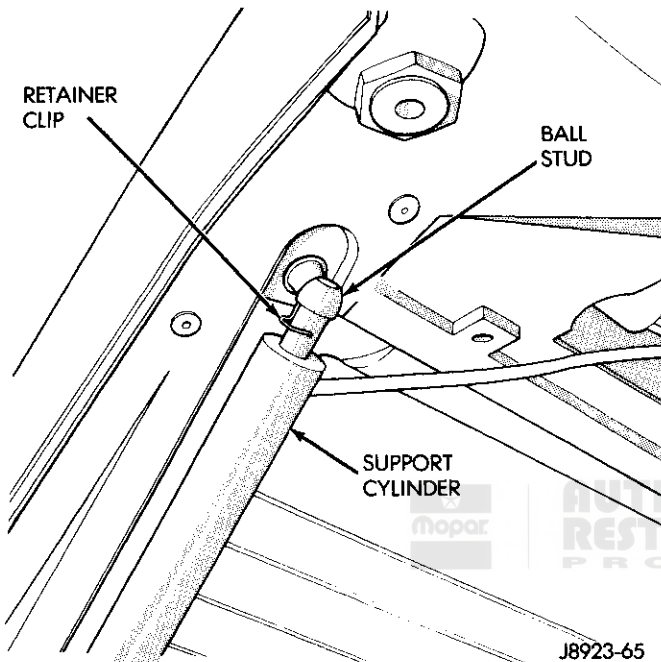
Removing/Installing Support Cylinder Retainer Clips
